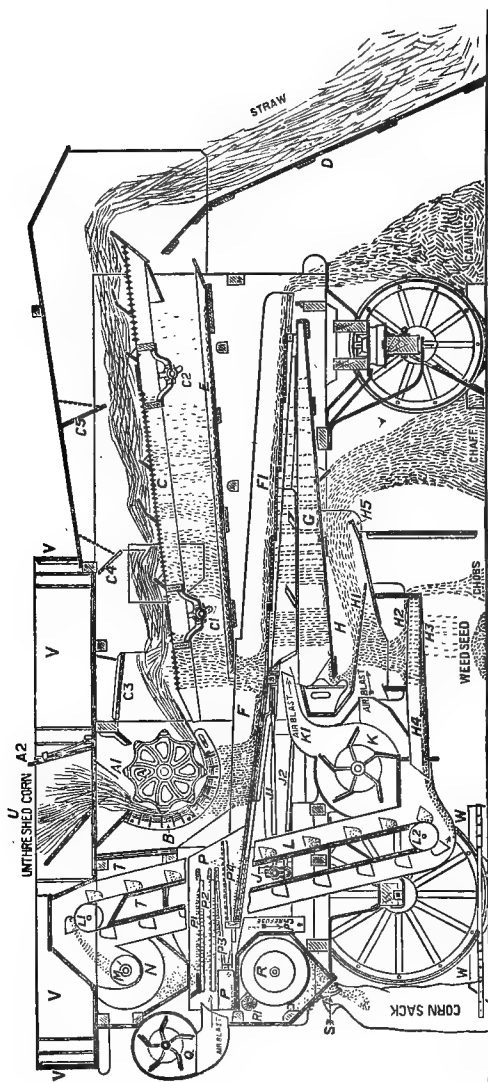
SECTION OF THRESHING MACHINE.—LONGITUDINAL VERTICAL SECTION.
